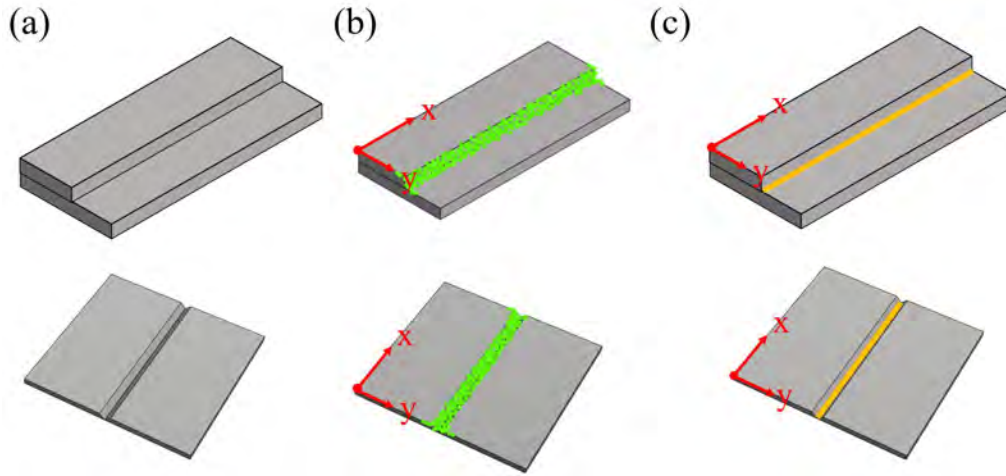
(a) Two different types of workpieces: Fillet welding and Butt welding workpieces; (b) The groove detection algorithm is applied to locate the possible welding area. Groove points G are displayed in green color; (c) Welding seams are indicated in orange.
